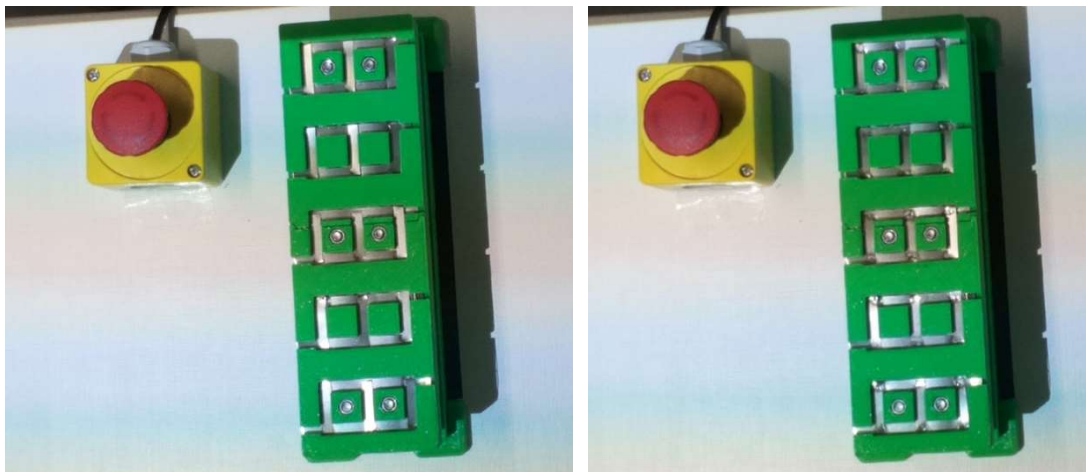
Weldless nickel (left) and welded nickel (right).
